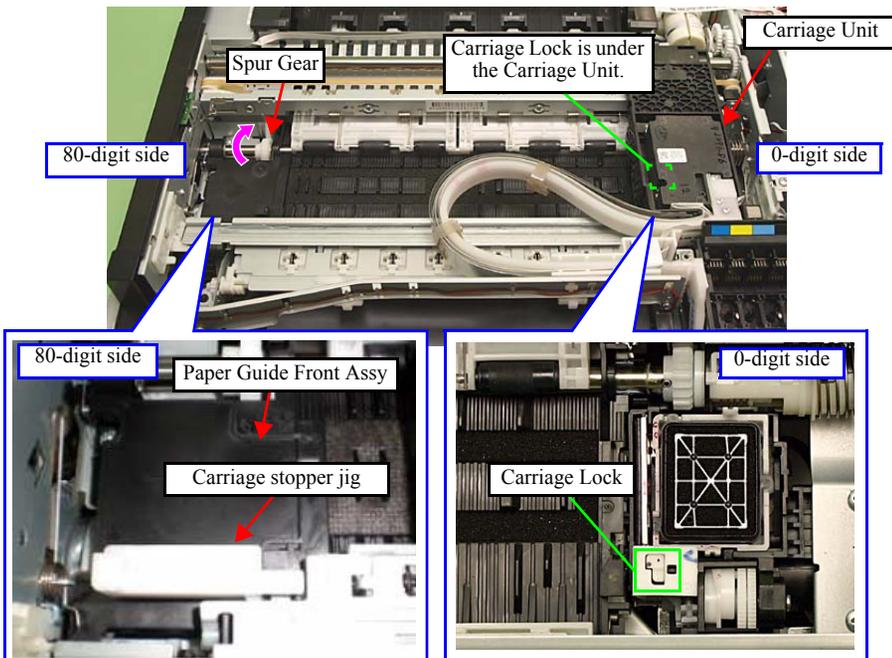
Releasing the Carriage lock and placing the Carriage stopper jig
